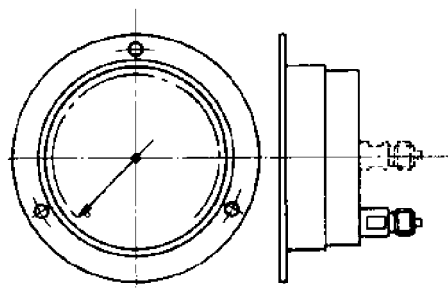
FLUSH MOUNTING GAUGE WITH BACK CONNECTION
